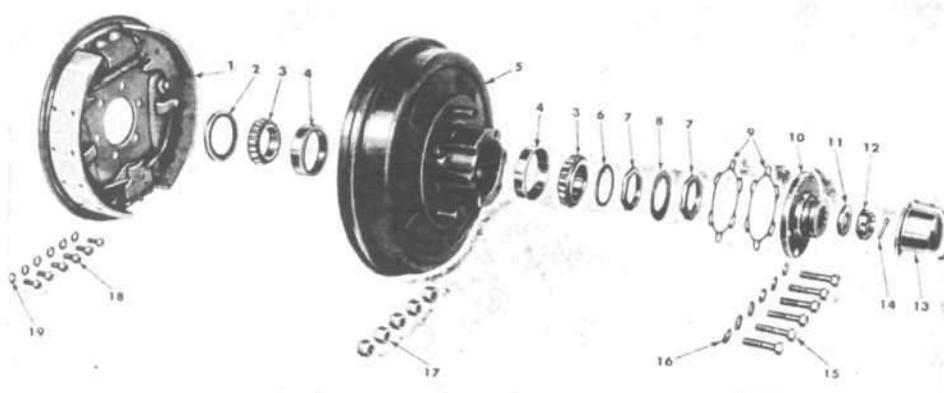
FRONT WHEEL ATTACHING PARTS — 4-WHEEL-DRIVE VEHICLES
